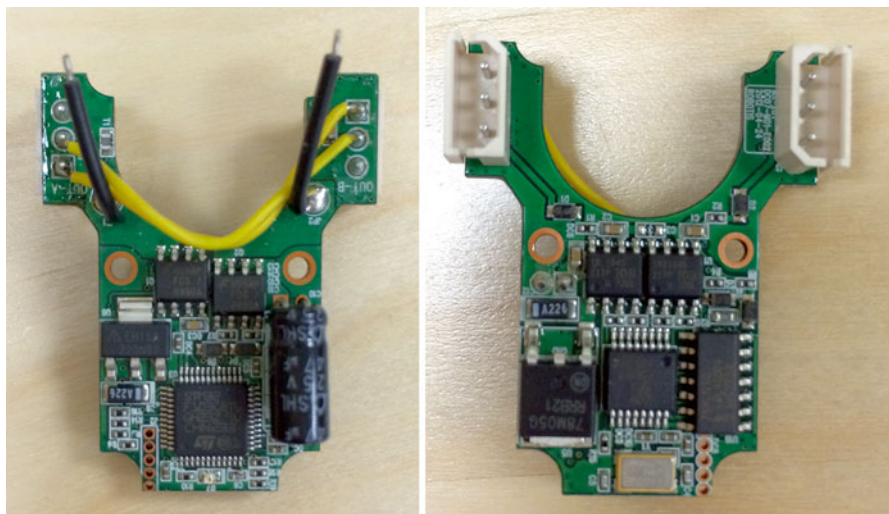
(a–b) Two views of the PCB of an MX-28T
